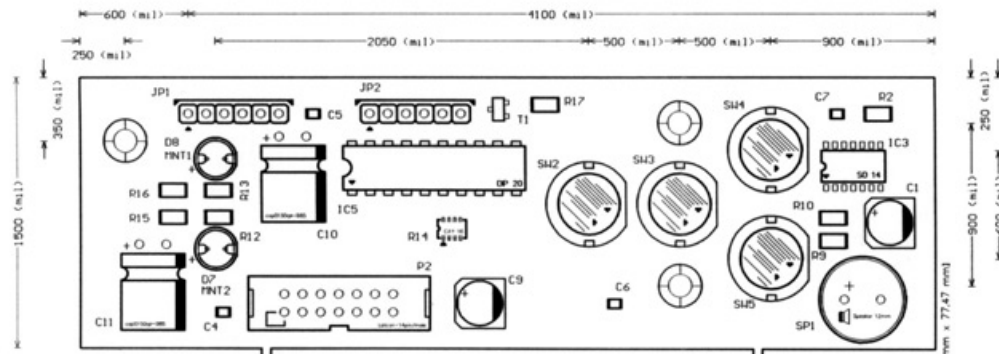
Keyboard module for the ZoomDriver AddOn with dimensions
